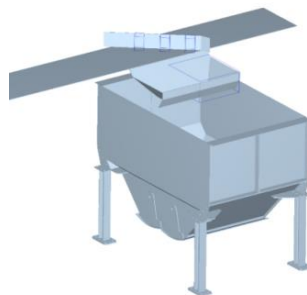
Model of the Belt Conveyor, Mobile Discharging Cart, and Coal Bunker
